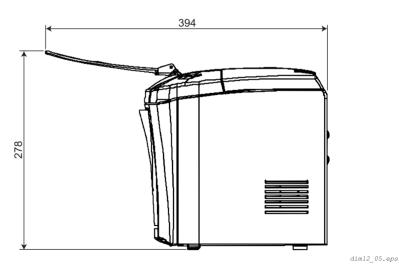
Right Side View of EPL-5900L with Paper Eject Tray Attachment Installed
